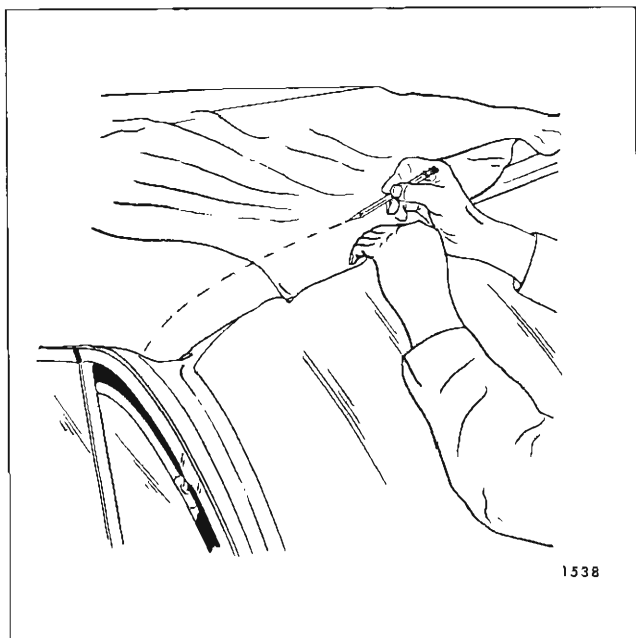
Marking Top Material at Front Roof Rail
